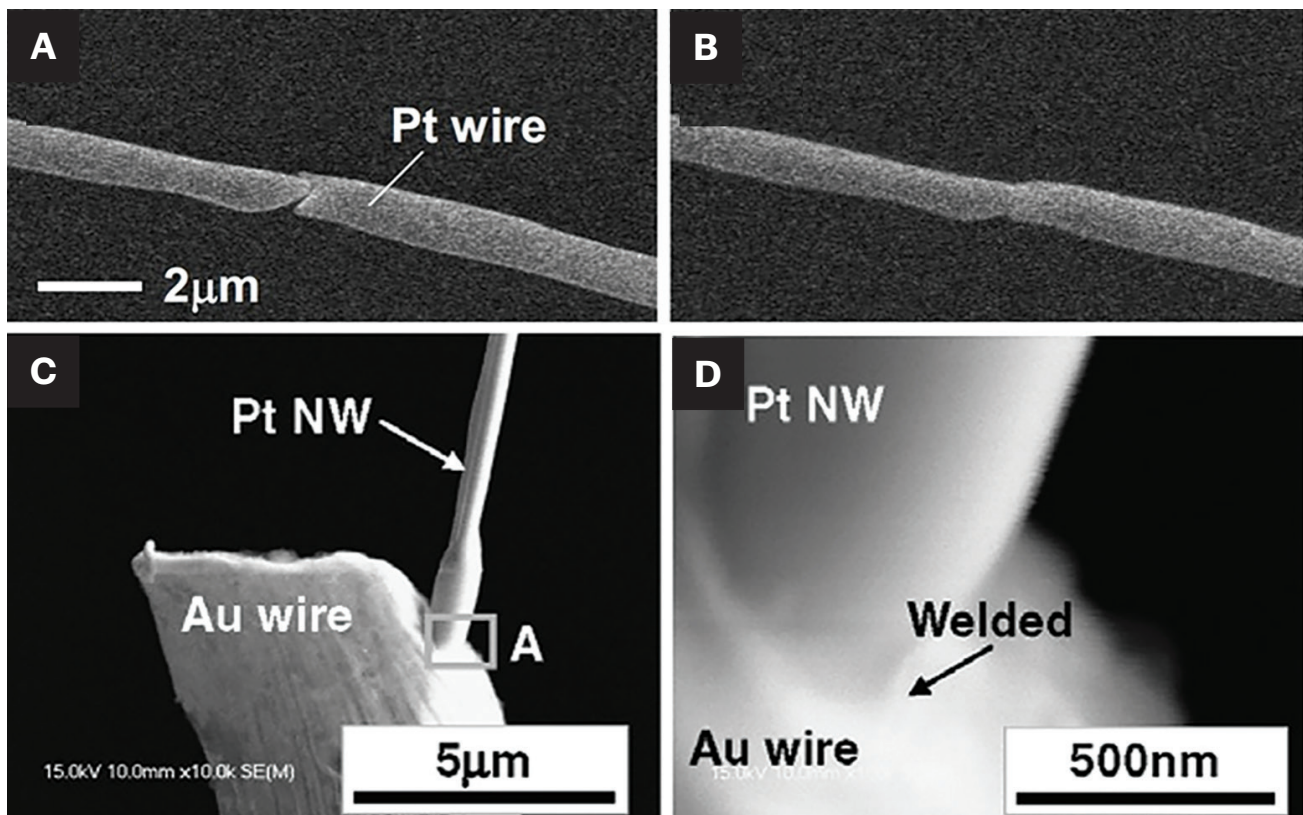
SEM images of resistance welding of Pt nanowires (Ref. 22): A — Before welding; B — after welding. Additional SEM images show: C — a Pt nanowire welded to an Au wire; D — a magnified view of region A in C (Ref. 23).
